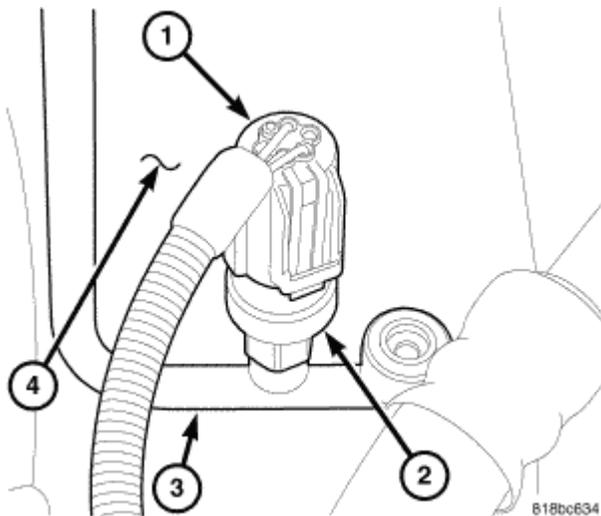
Wire Harness Connector, A/C Pressure Transducer, A/C Liquid Line & Dash Panel
